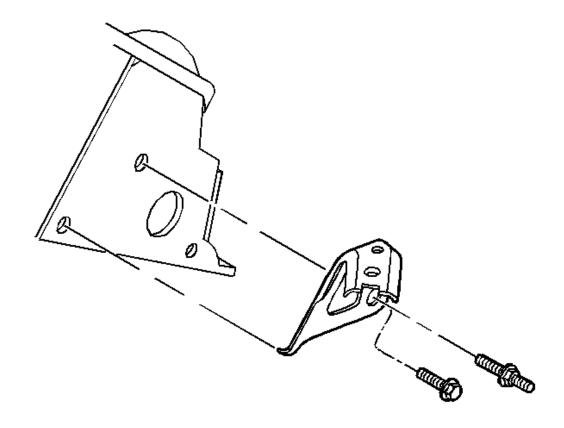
Removing/Installing Fuel Line Bracket Courtesy of GENERAL MOTORS CORP.
